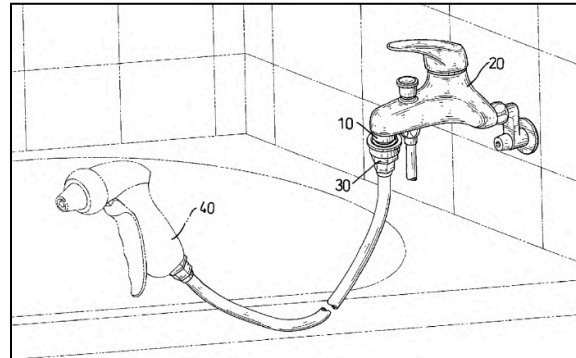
Drawing of a faucet hose connector [14]. The connection (30) is threaded and can be screwed to a faucet with threads and directs water into a tube, which is in turn connected to a spraying device at the distal end (40) [14].
